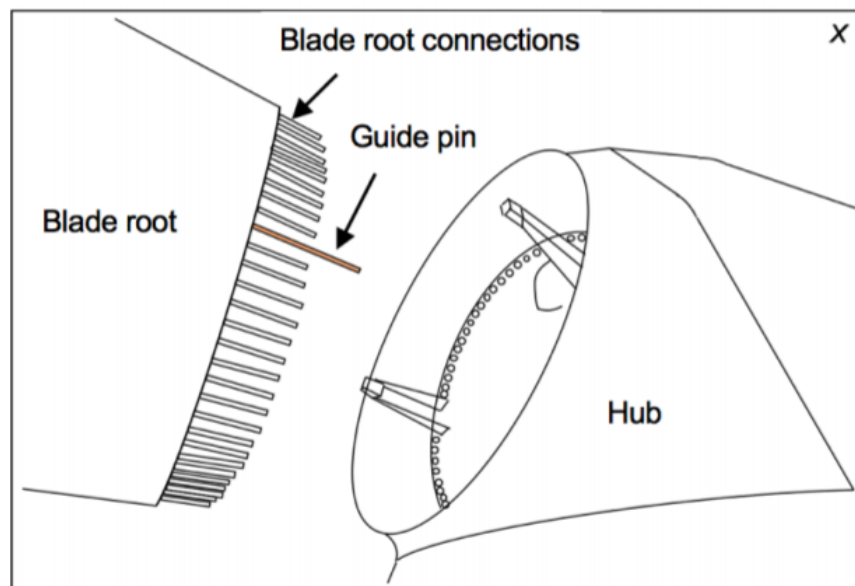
Magnified view of the blade root and the guide pin [22]
